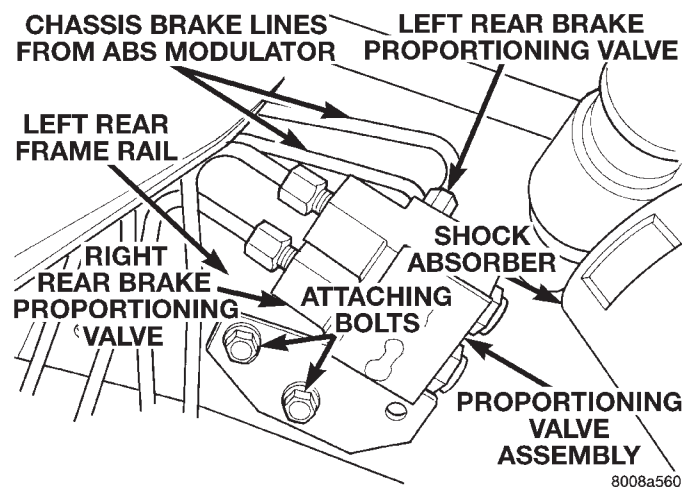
Rear Brake Proportioning Valve And Brake Tube Locations
